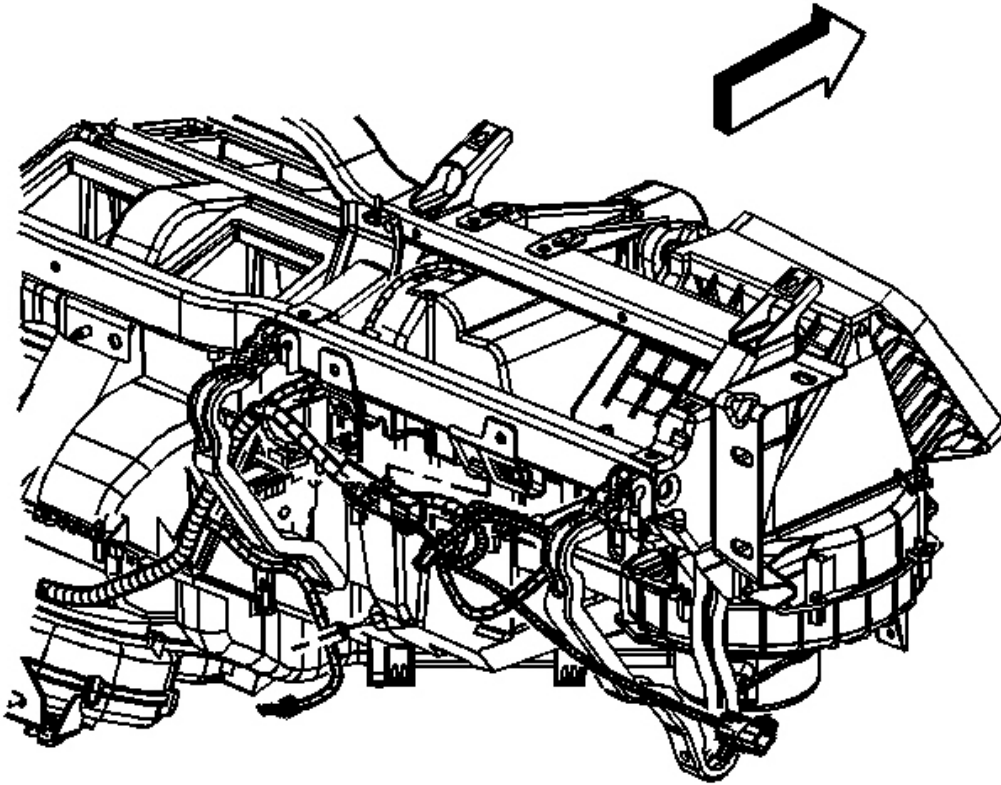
Identifying Steering Column Support Bracket Top Retaining Bolts
